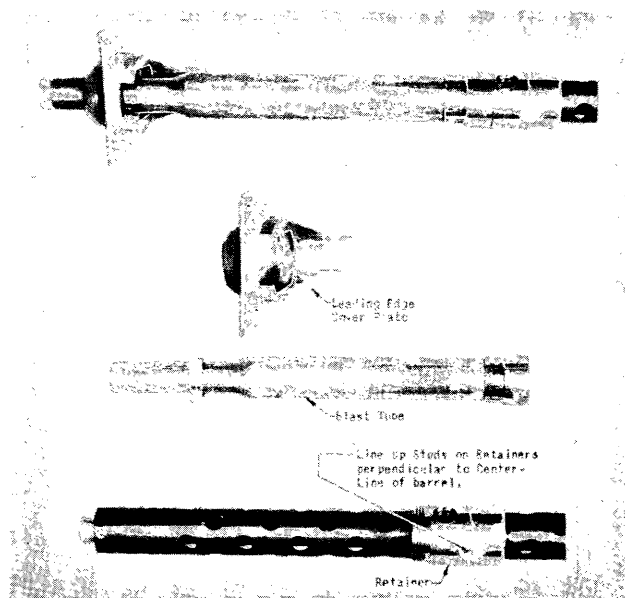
Blast Tube and Cover Plate Assembled and Disassembled
